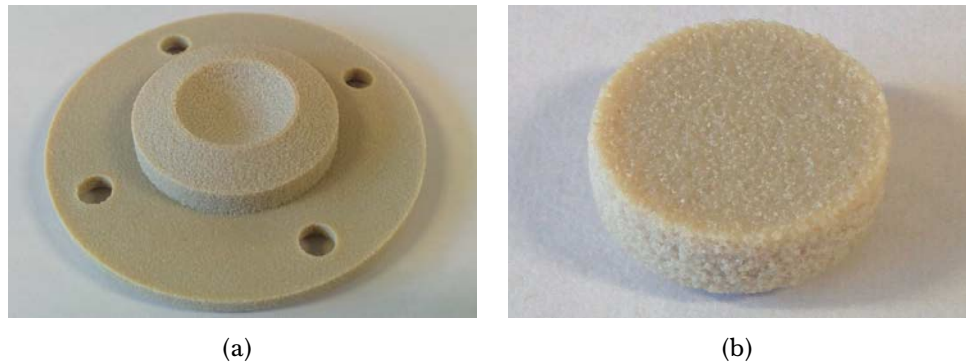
Sintered PEKK specimens, where (a) is a spinal implant specimen and (b) is a specimen for the HFRR.
